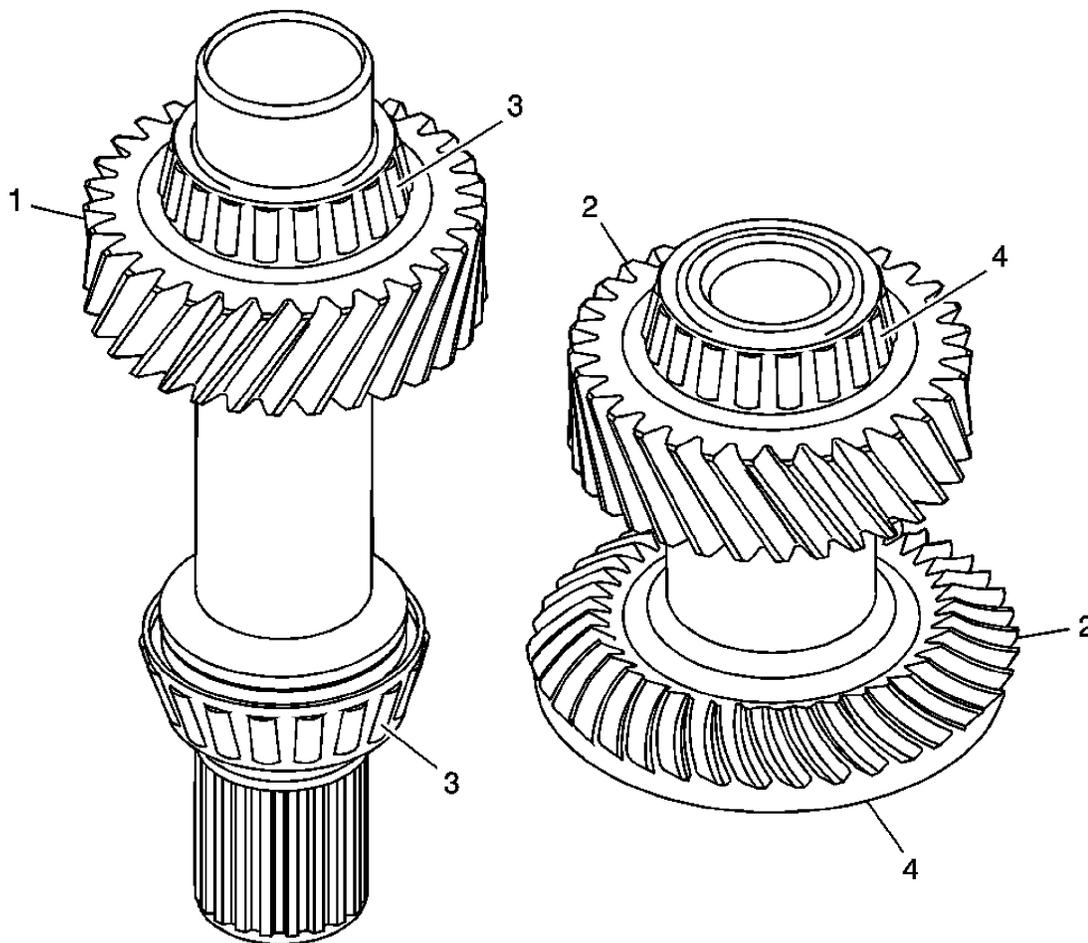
Identifying Input Shaft And Rear Output Drive Shaft
